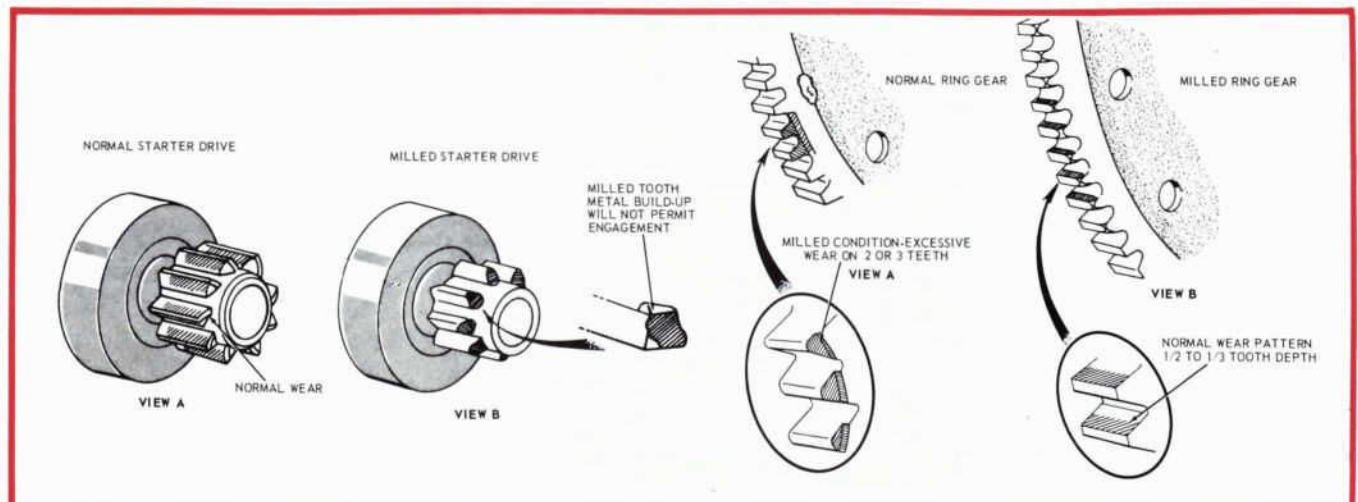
Starter Drive Pinion and Flywheel Tooth Damage
